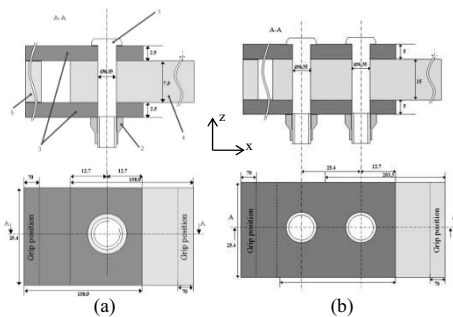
fatigue specimens: (a) double lap bolted joint with one fastener (b) double lap bolted joint with two fasteners
